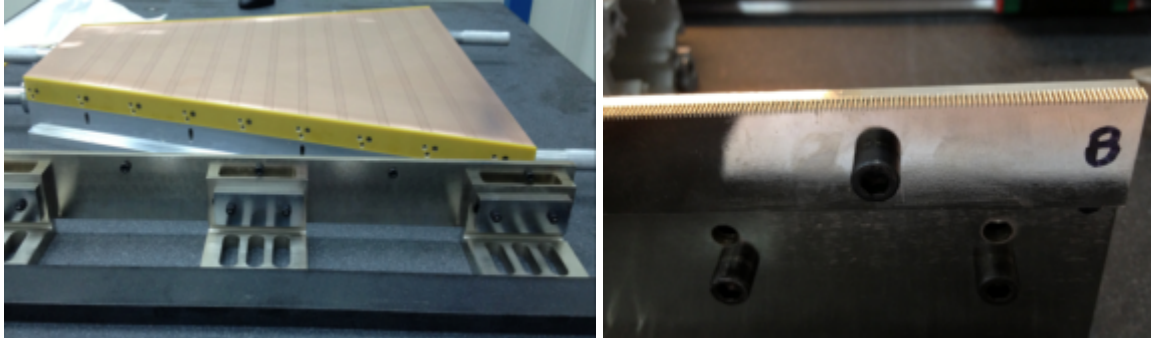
One side the wire combs installed including angle plates, straight edge and combs (left), and a zoomed view for the combs and straight edge..
